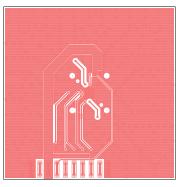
SKY65346-21 Evaluation Board Assembly Diagram
